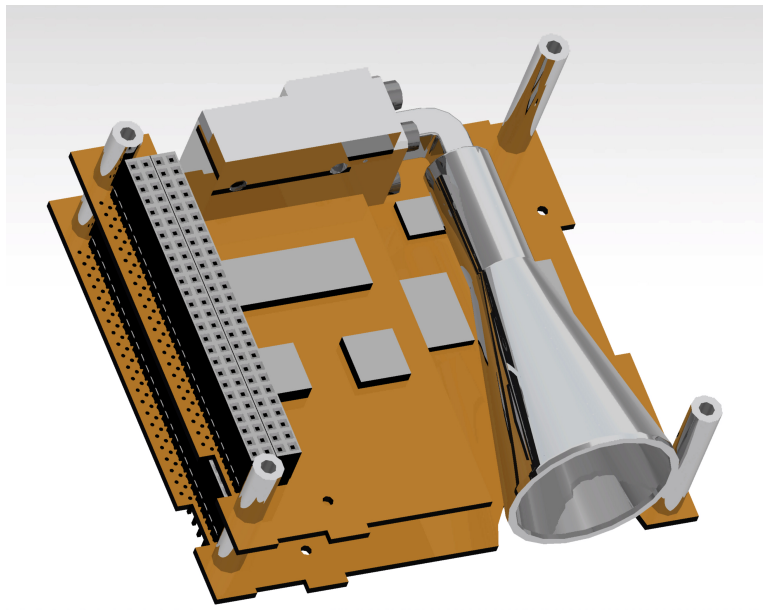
Draft of a possible conic W-band horn within the 33 mm wide instrument (front panel removed), 3D CAD model
